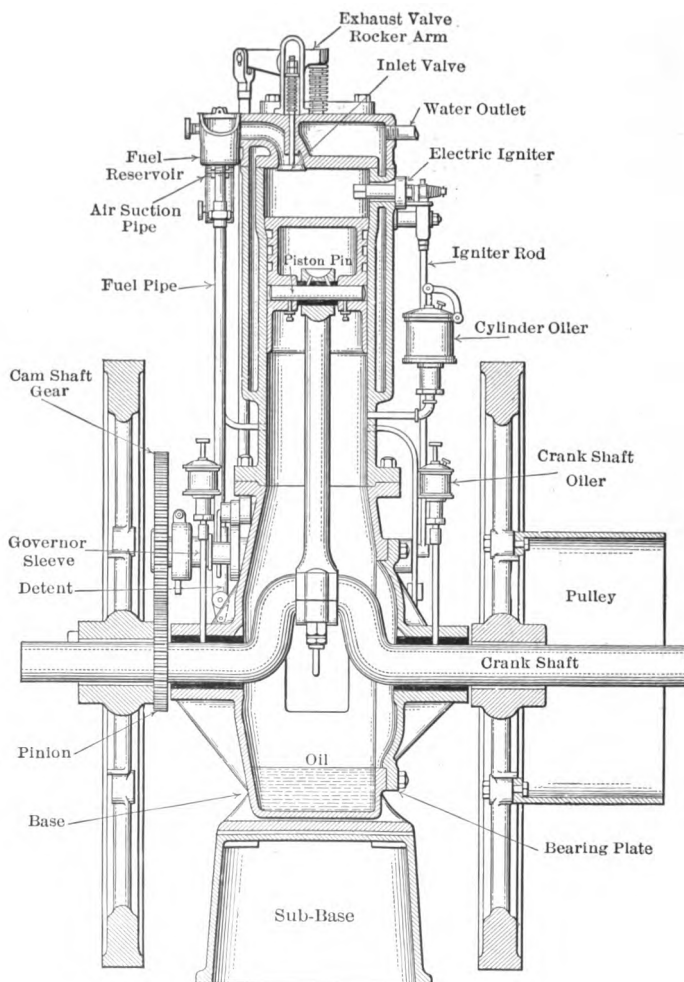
Section Fairbanks-Morse Type T Engine.
